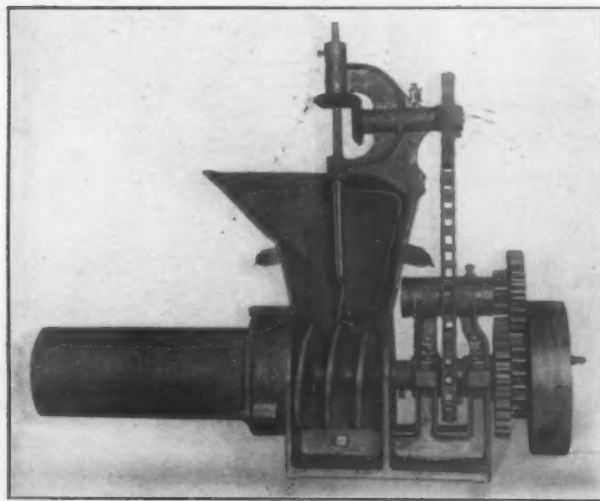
View of the Machine with the Hopper Cover Removed.
